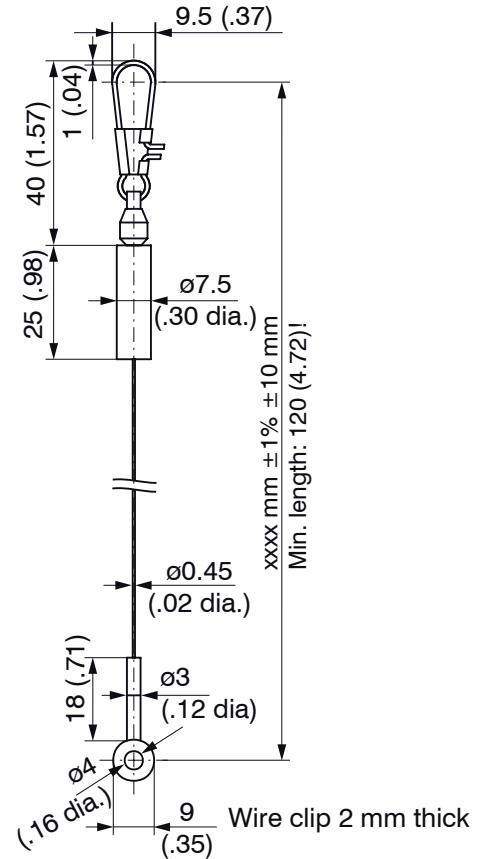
Wire extension WE-xxxx-M4, dimensions in mm (inches), not to scale
